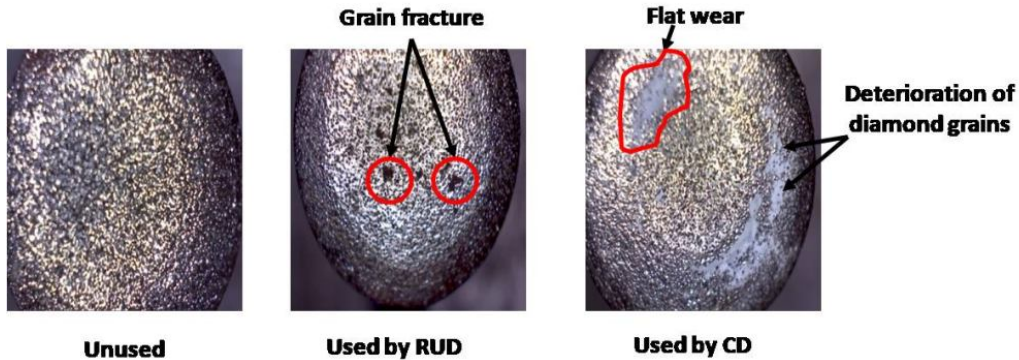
Microscopic images of all tools' end face surfaces at three stages. These are unused, used by RUD, and used by CD
